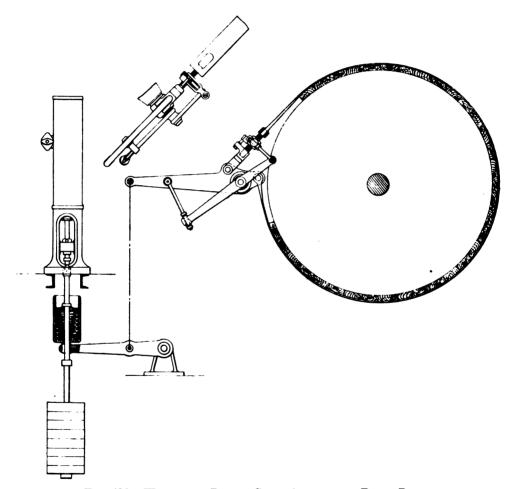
WHITMORE BRAKE GEAR APPLIED TO BAND BRAKE.
